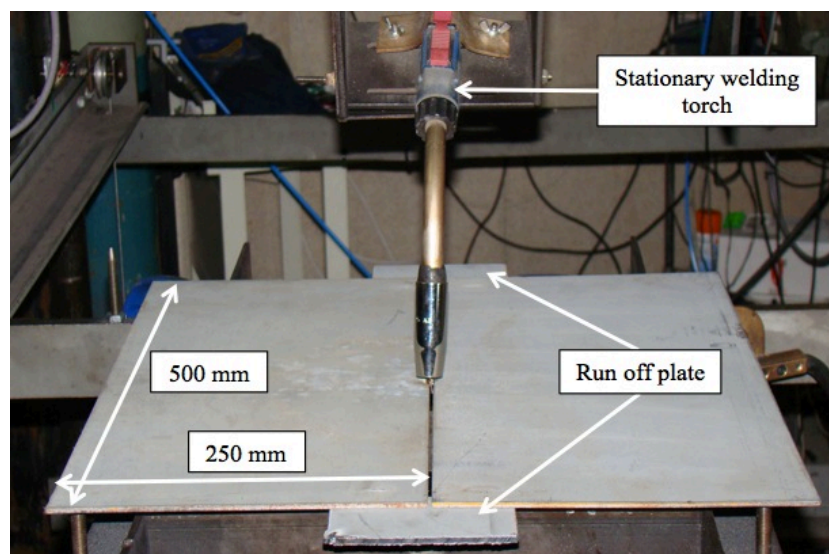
Weld setup for butt configuration shielding gas optimisation trials
